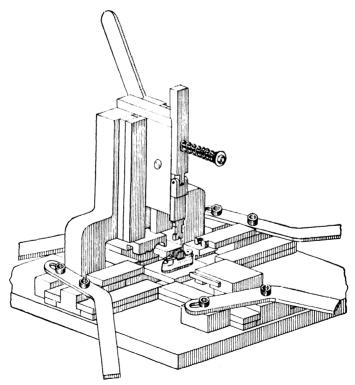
Hand-operated bench fixtures for removing light fins from die-cast parts. When size and power requirements are heavier, kick or power presses are utilized.
